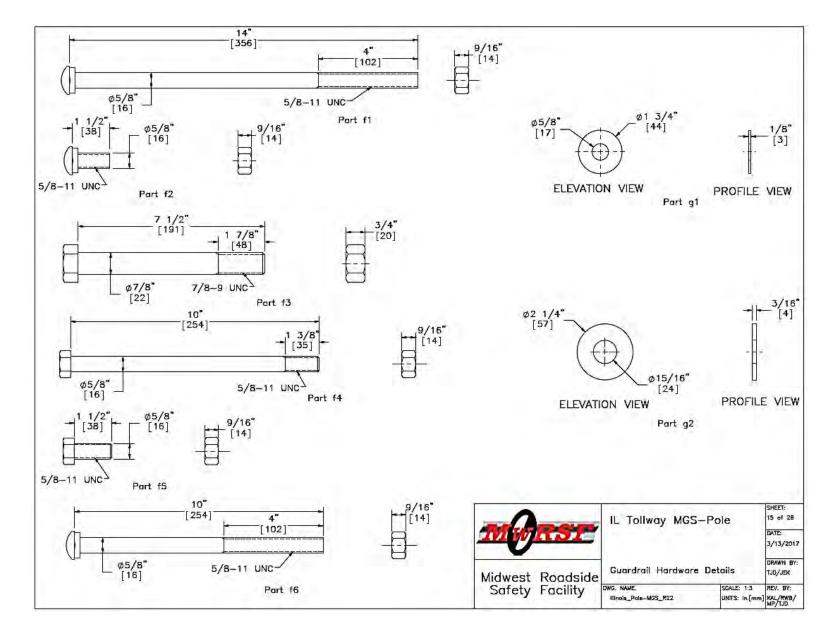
Guardrail Hardware Details, Test No. ILT-1
